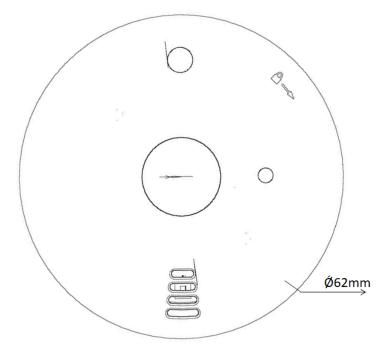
Modbus 4in1 Sensor Dimension - Top View
